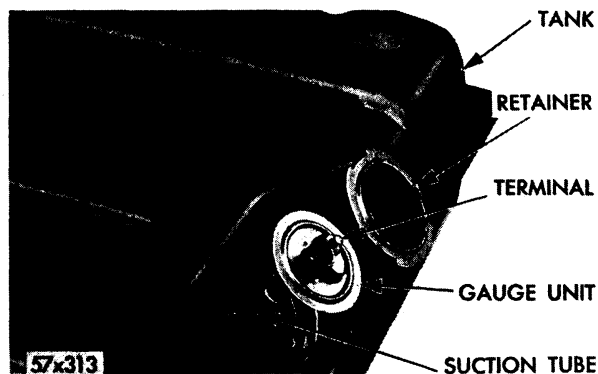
Removing and Installing Fuel Gauge (Tank Unit)
